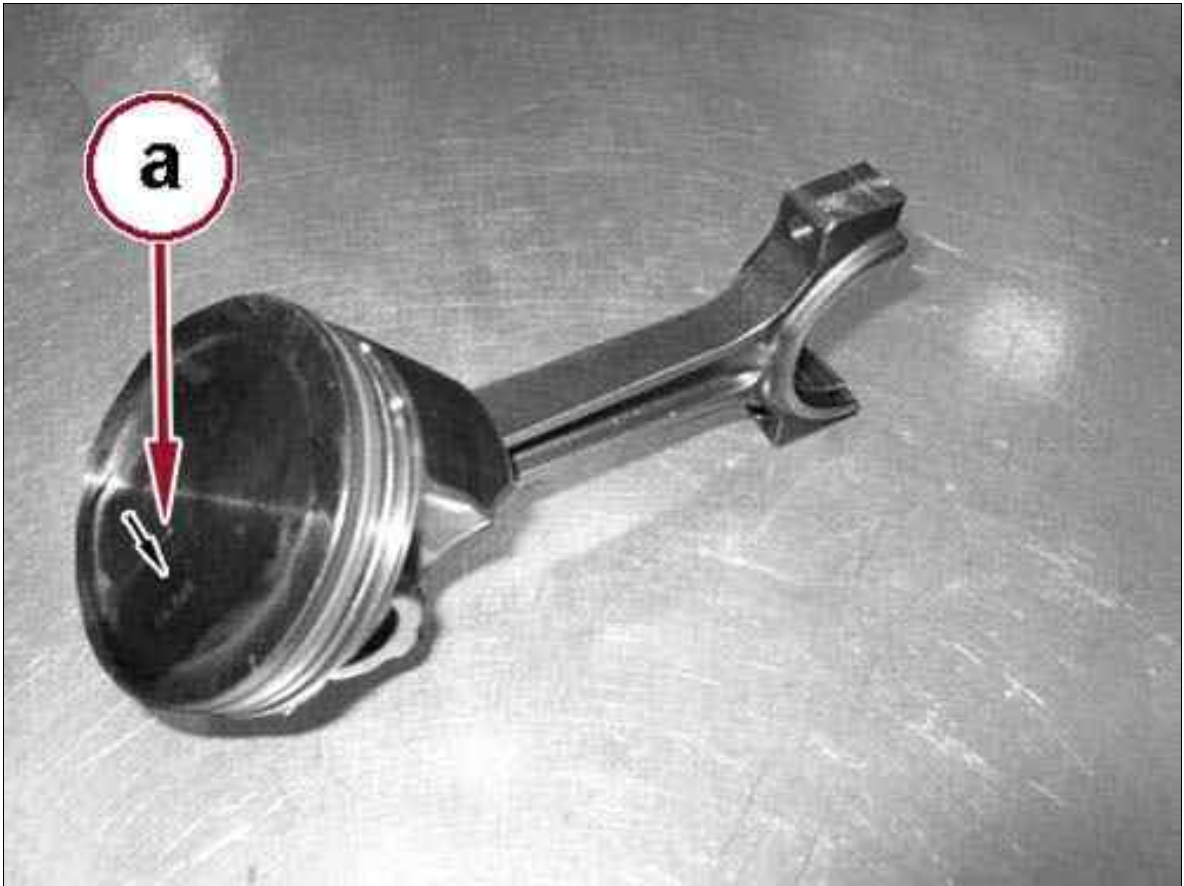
Piston-Connecting Rod Assembly With Half-Bearing
